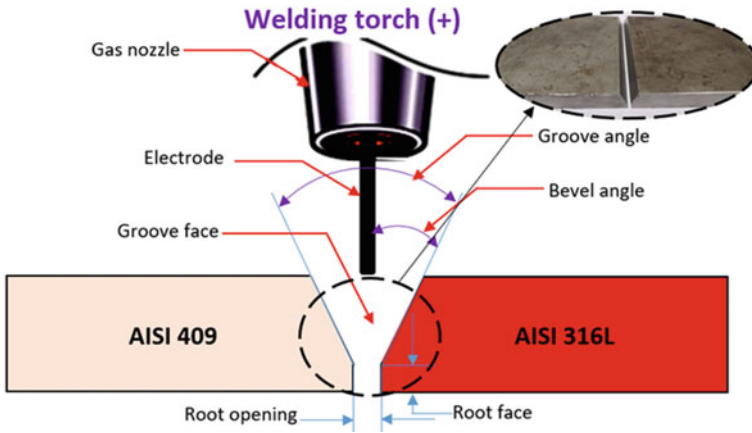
Schematic illustration of the dissimilar metal weld joint
